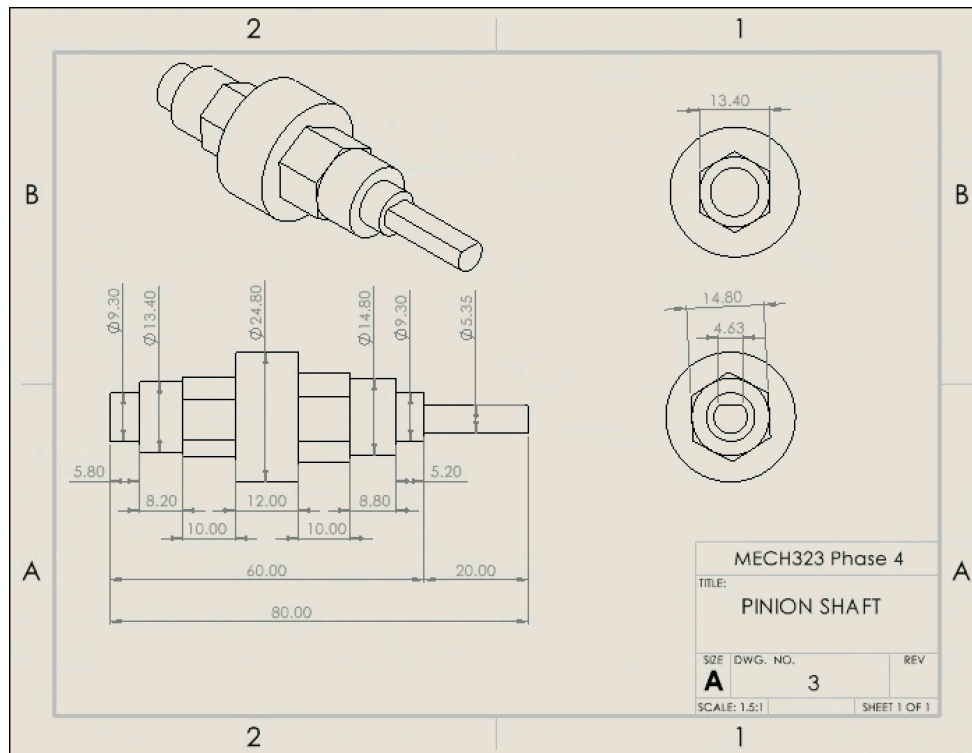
Fully dimensioned drawing of the pinion shaft. Drawing includes the front, back and right views, as well as an isometric view of the part.
